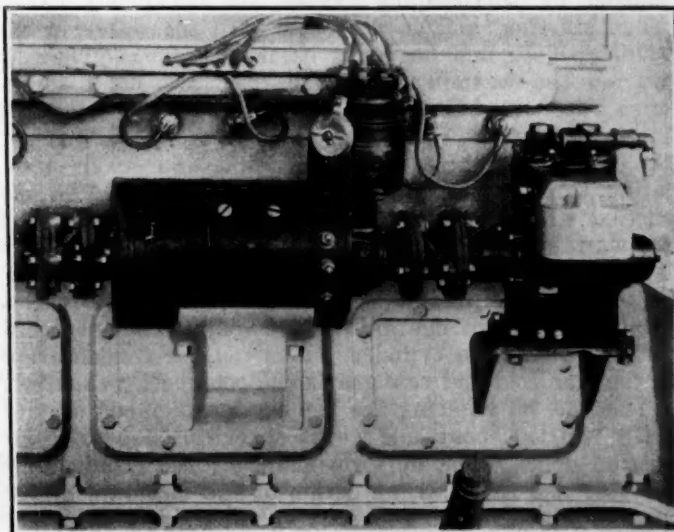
GENERATOR AND DRIVE TO AIR-COMPRESSOR
